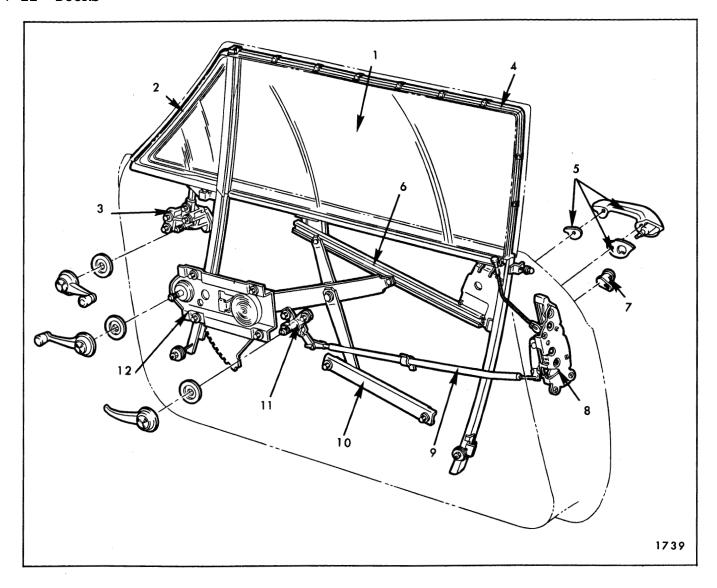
Front Door Hardware - "B" Closed Styles
